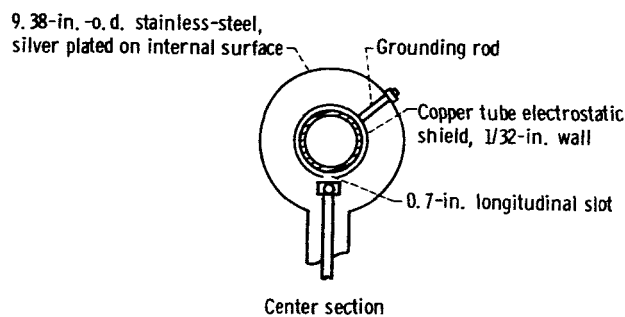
Details of rf-coil electrostatic-shield assembly.
